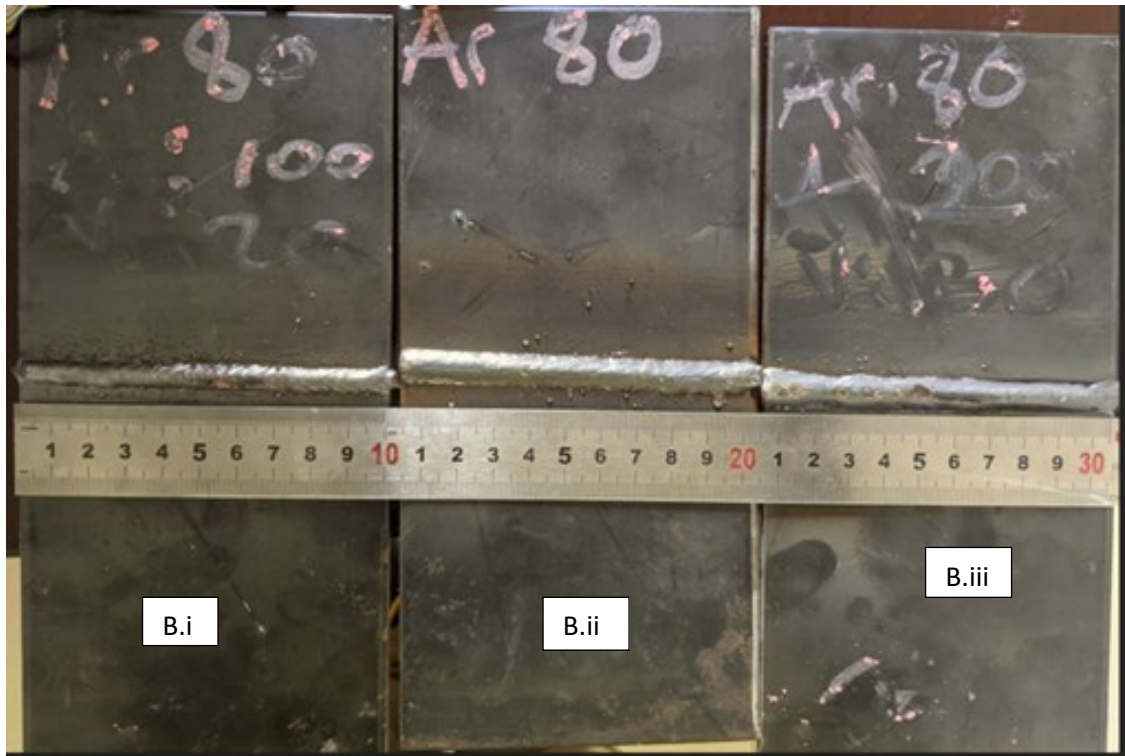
Appearance of the bead surface conditions for welded samples B. i; B.ii & B.iii.
